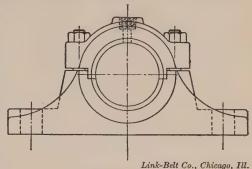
HEAVY DUTY JOURNAL BEARING.
